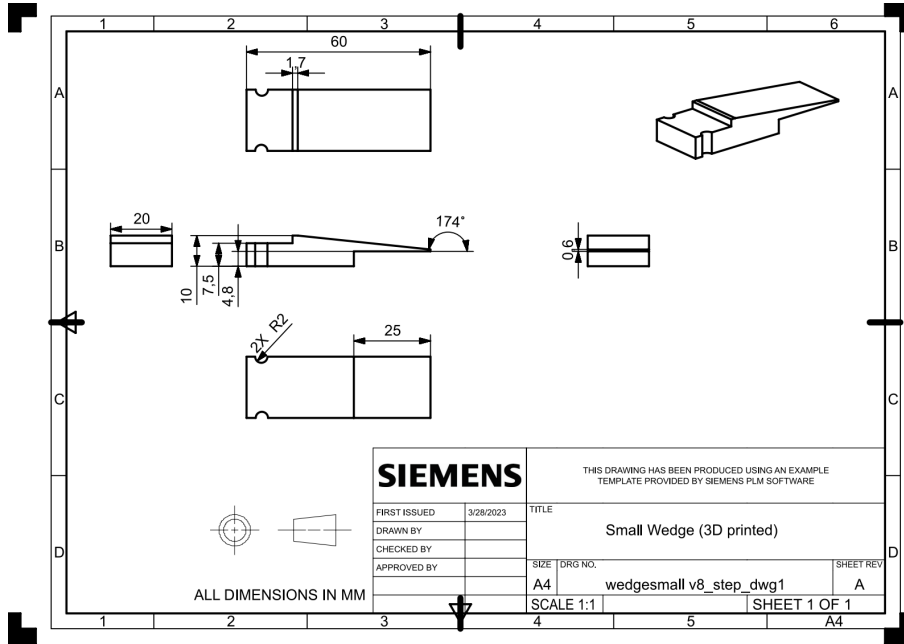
Engineering Drawing of Small Wedge (3D Printed)
